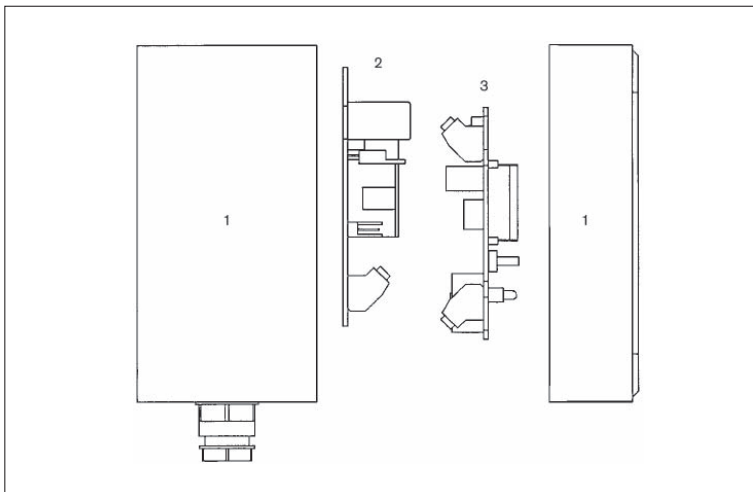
Spare parts explosion drawing 8025 Universal, panel-mounted version
